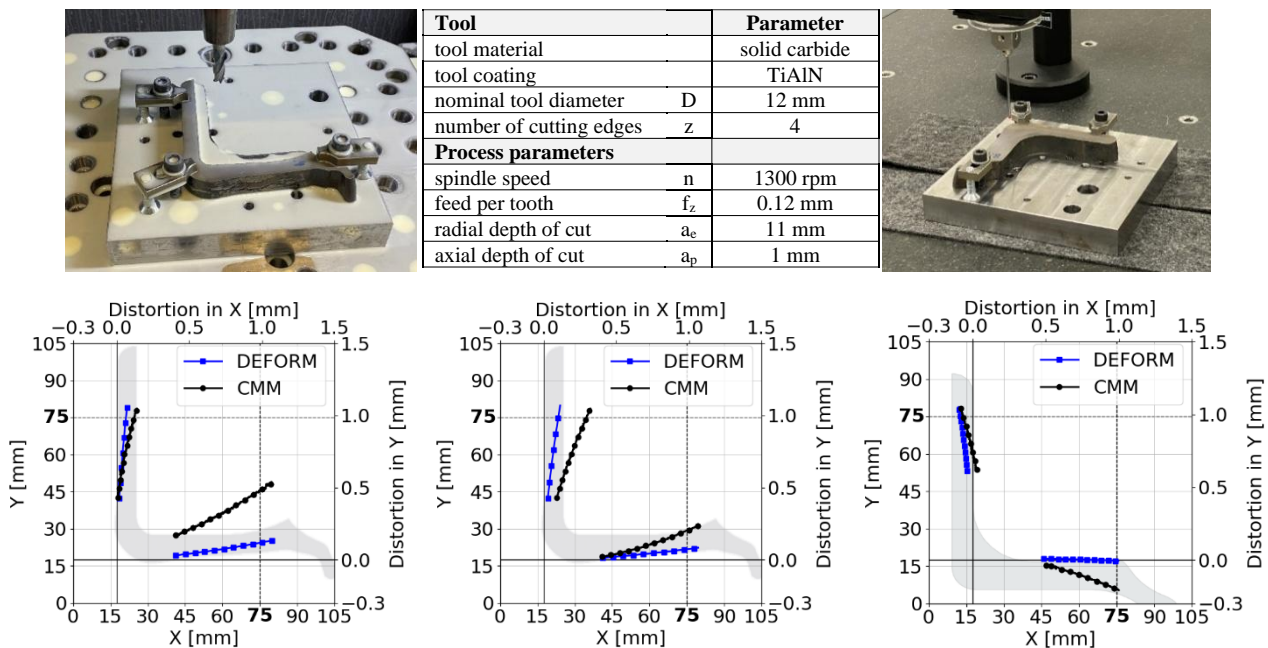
Overview about experimental setup and final distortion results; top-left: milling on a machining center; top-middle: technological cutting parameters; top-right: distortion measurement on a coordinate measuring machine; bottom-left: validation series 1, bottom-middle: validation series 2, bottom-right: validation series 3
